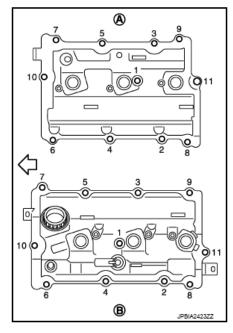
Rocker Cover Bolts Tightening Sequence Courtesy of NISSAN MOTOR CO., U.S.A.
